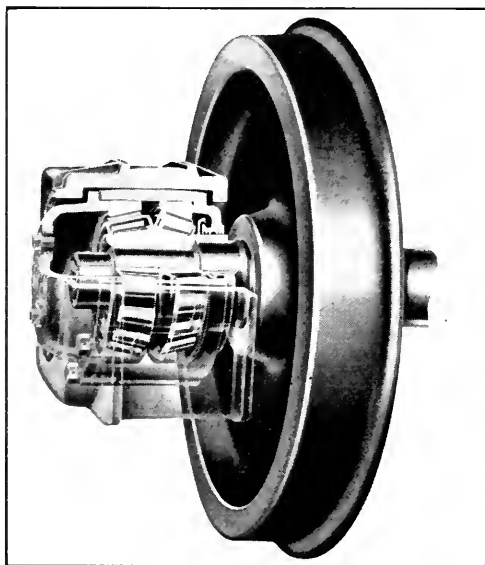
X-Ray view of Tapered Roller Bearing Application for Passenger Equipment.
